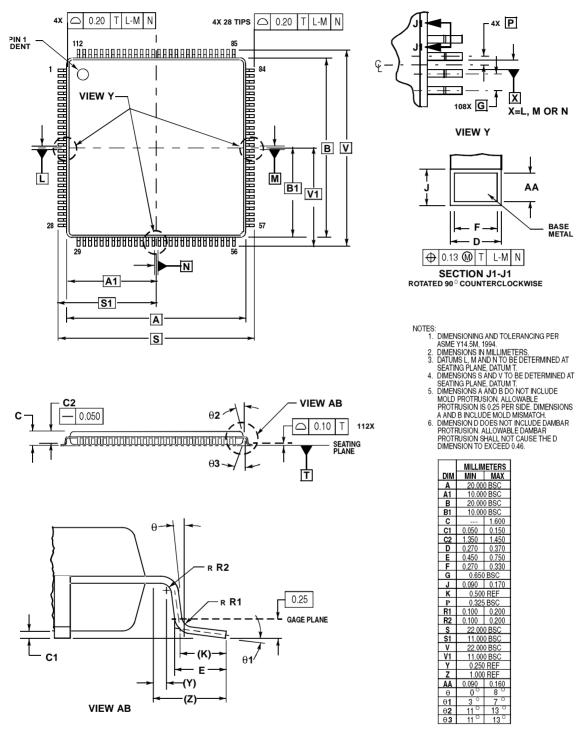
112-pin LQFP Mechanical Dimensions (case no. 987)
